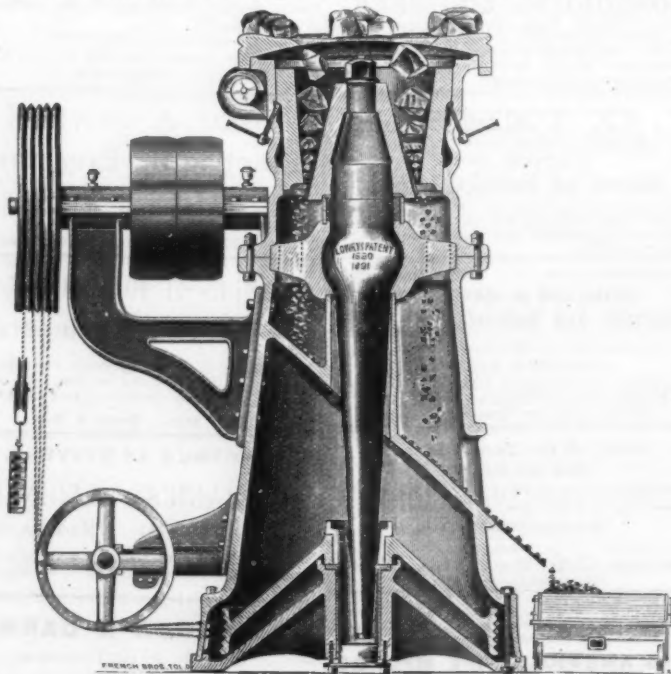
SECTIONAL VIEW OF THE LOWRY ROCK AND ORE BREAKER.
